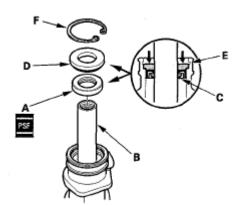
Pressing Cylinder End Seal Into Bottom Of Cylinder Courtesy of AMERICAN HONDA MOTOR CO., INC.
